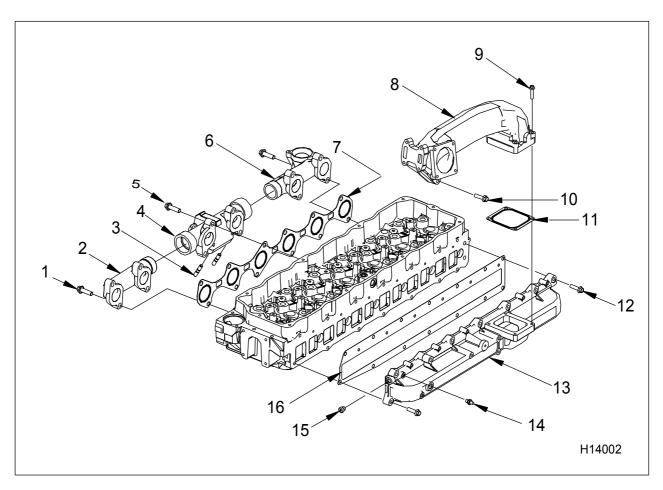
Intake manifold, inlet and EGR mixer, and exhaust manifold assemblies
